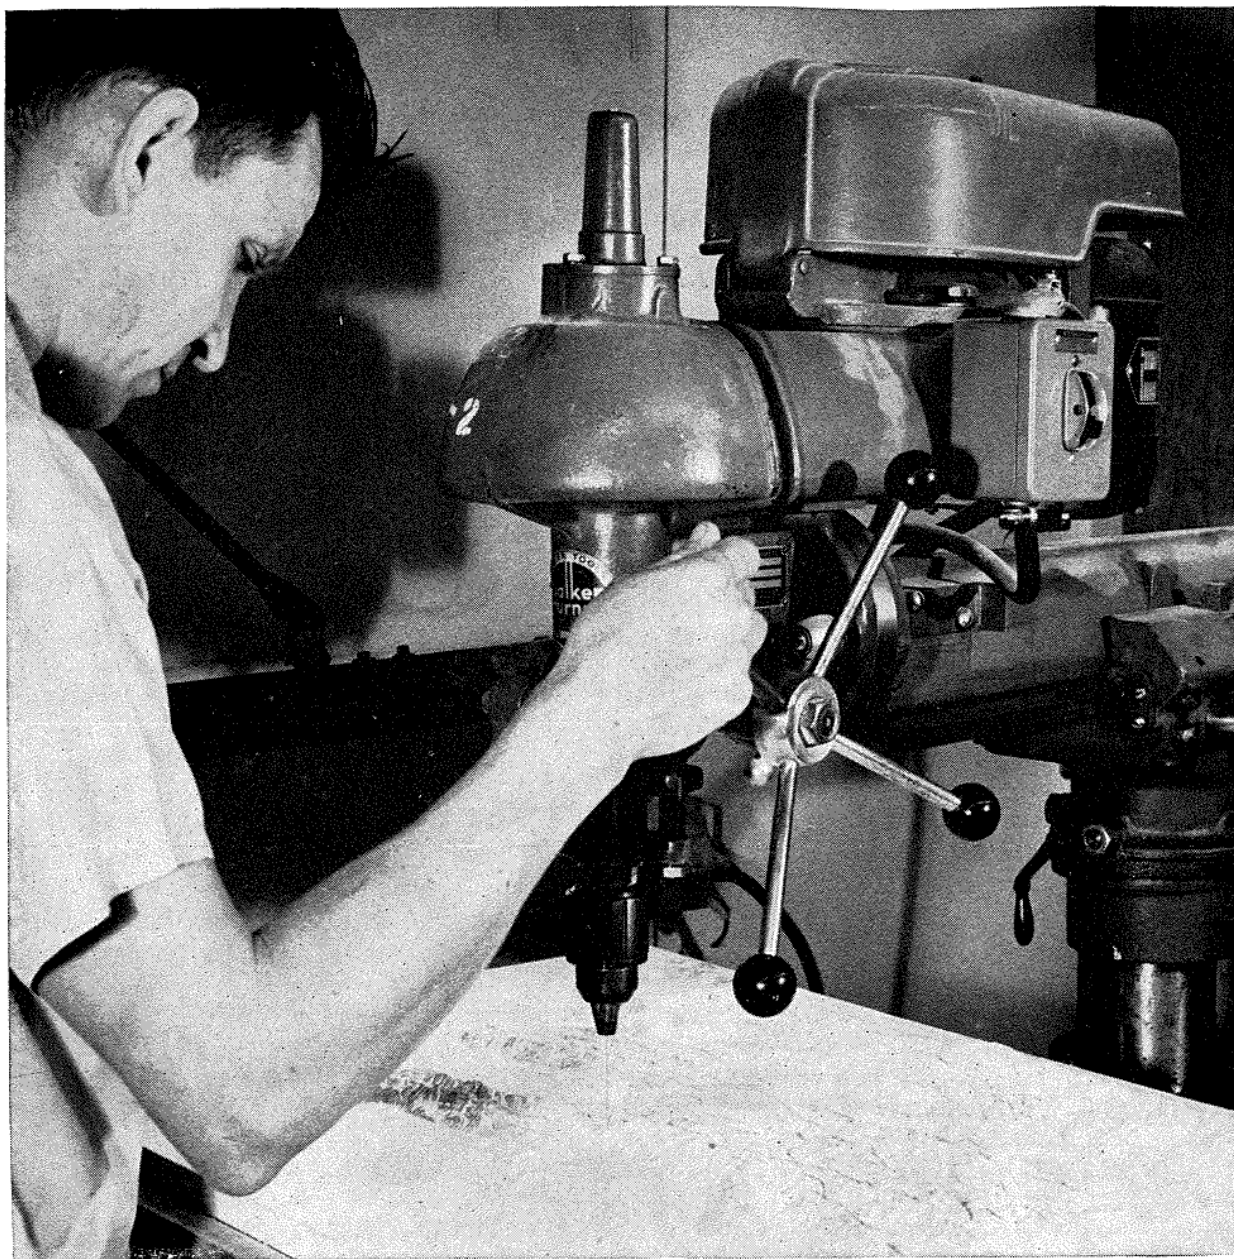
Drilling vacuum holes in the reproduction positive mold.
